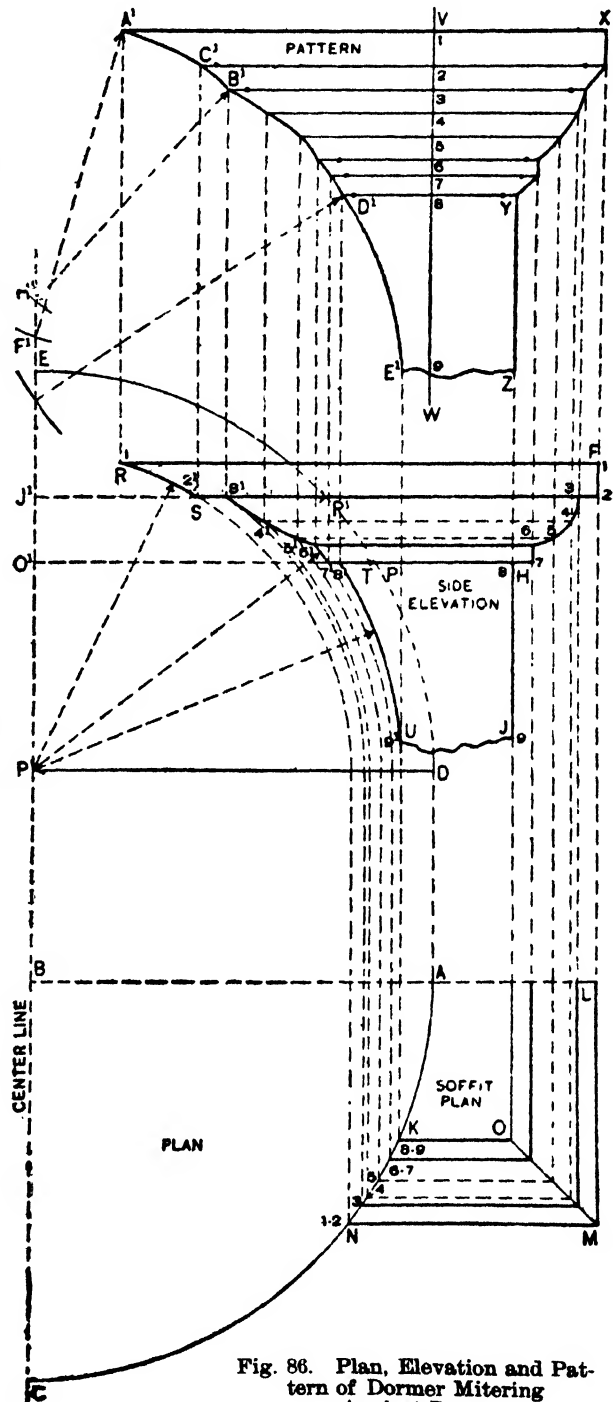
Plan, Elevation and Pattern of Dormer Mitering Against Dome
